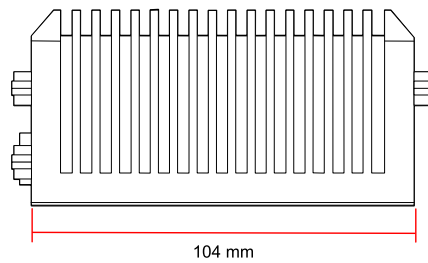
AMOS-3002-1D10A2 Dimensions - Side view
